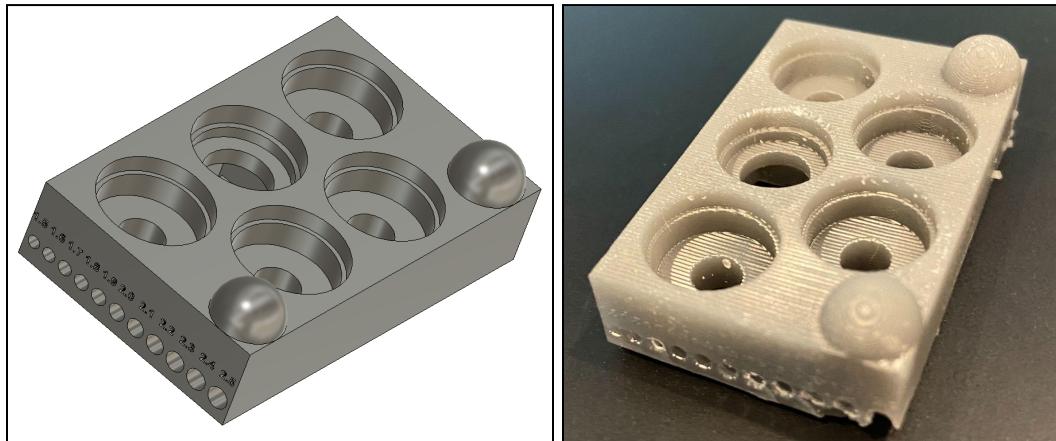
Above Left - CAD design of fitment test piece. The holes on the side range from 1.5-2.5mm so that the optimal size hole for self threading screws can be identified.
